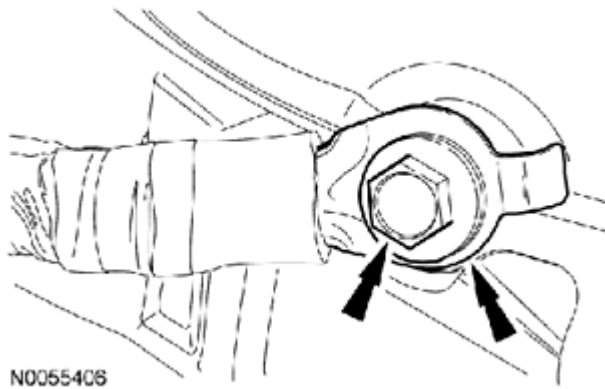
Identifying Exhaust Gas Recirculation Tube
